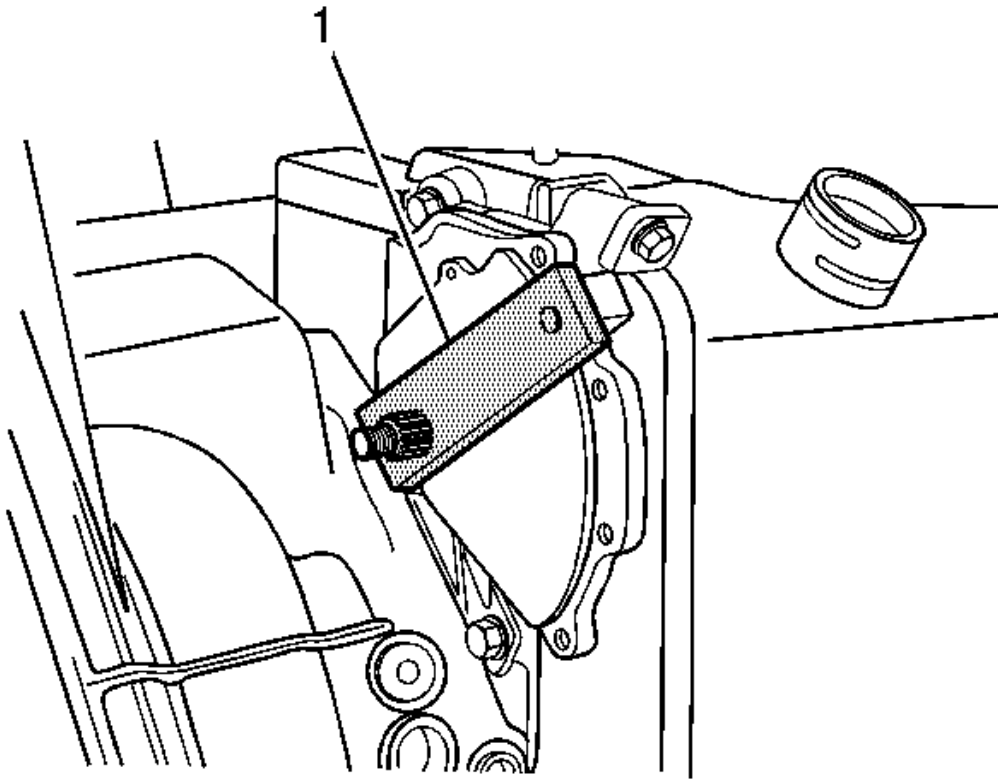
Low & Reverse & 1-2-3-4 Clutch Housing
